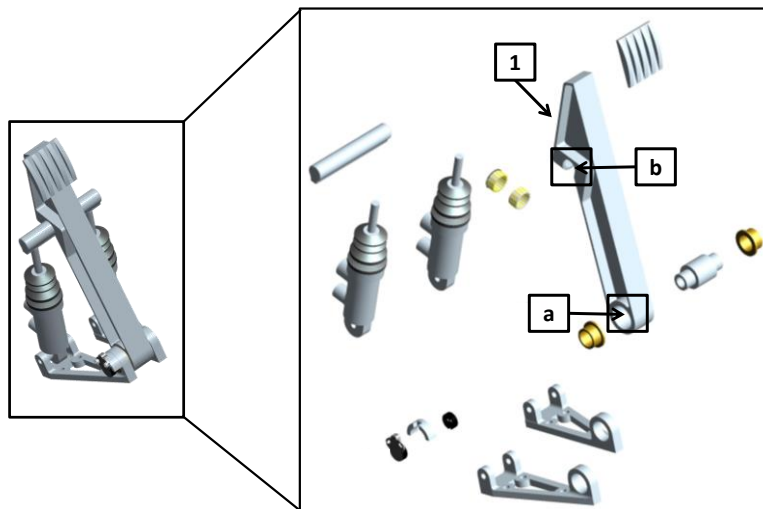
CAD model of the braking system and exploded view: Braking pedal (1), rotational bearing (a), bearing for the arm of balance (b)
